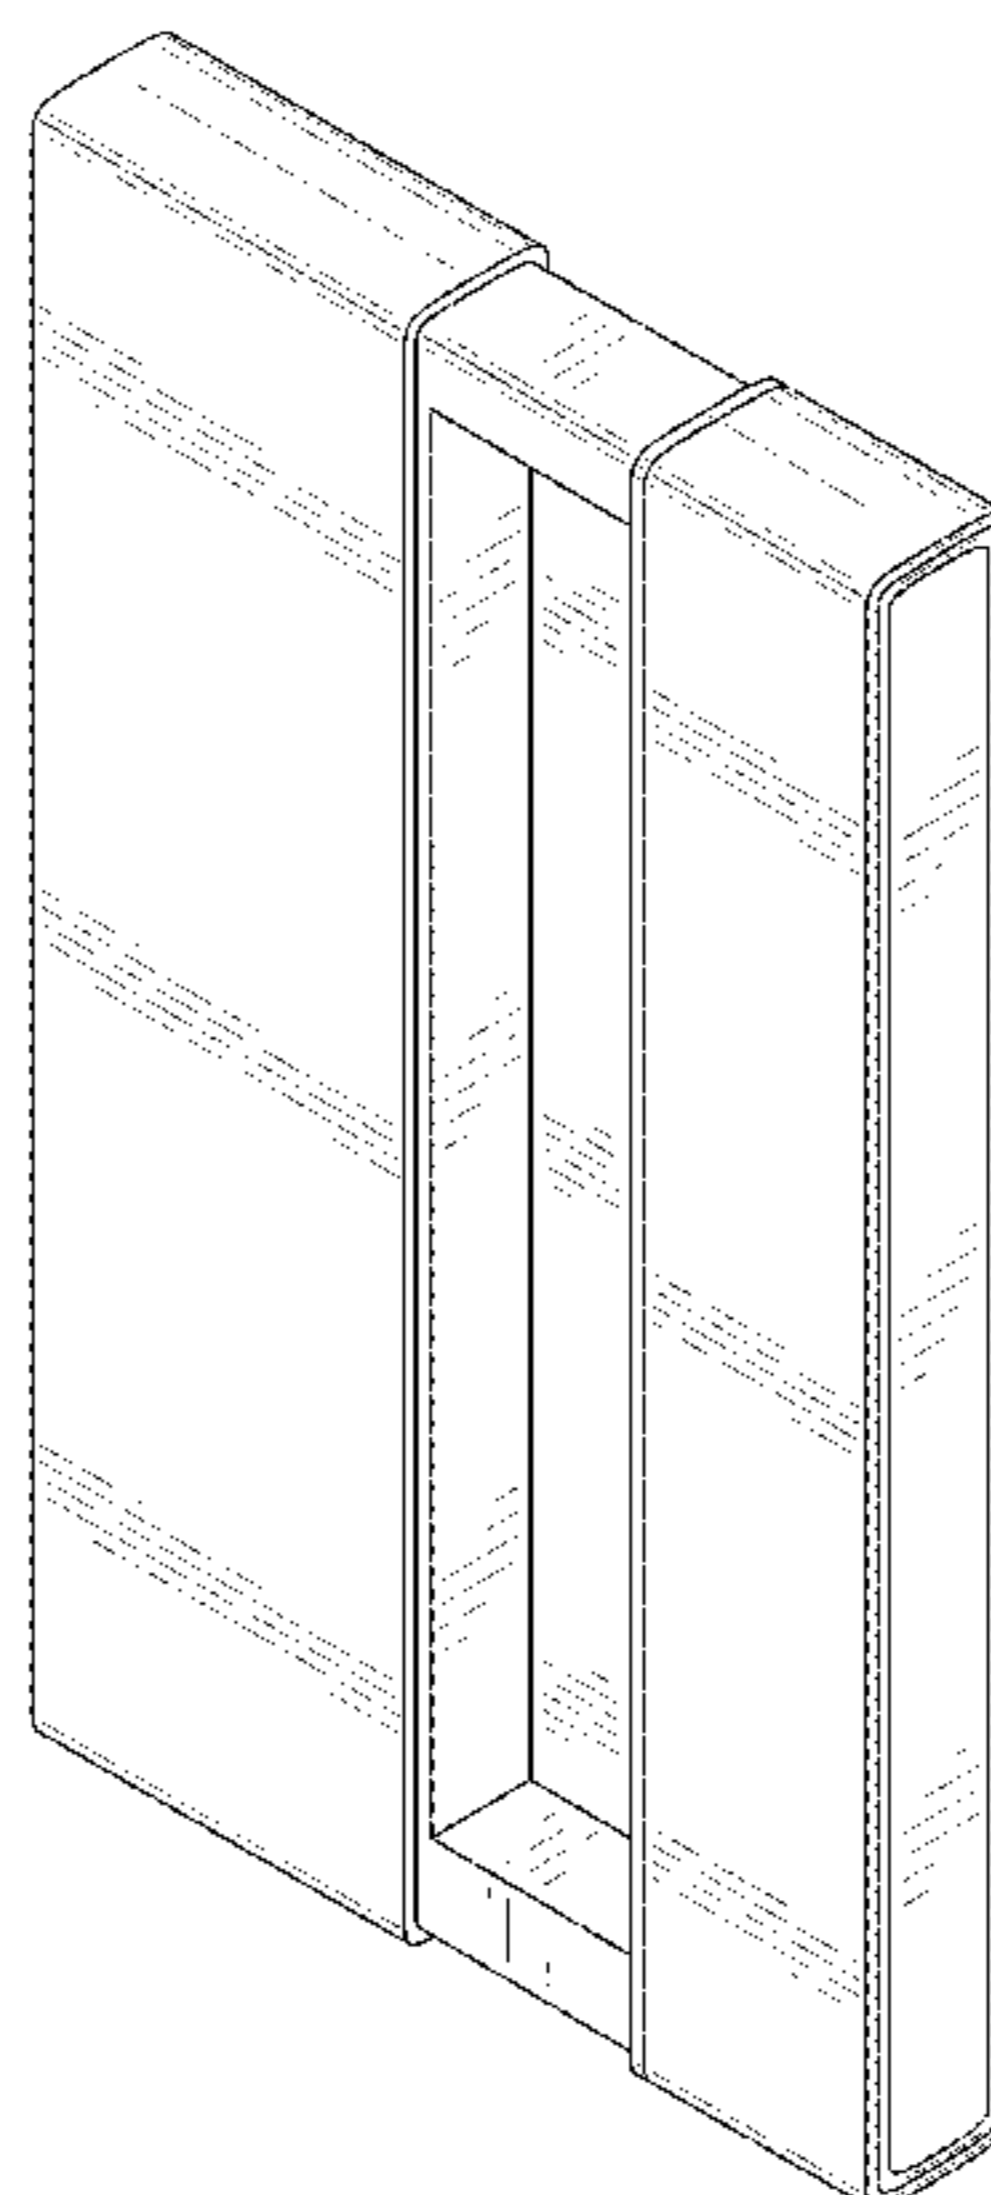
is a front, right side, and top perspective view of a case of our design;
